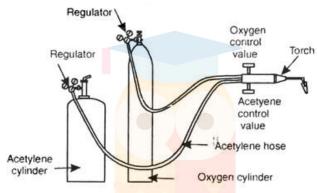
Oxy- acetylene Gas welding
